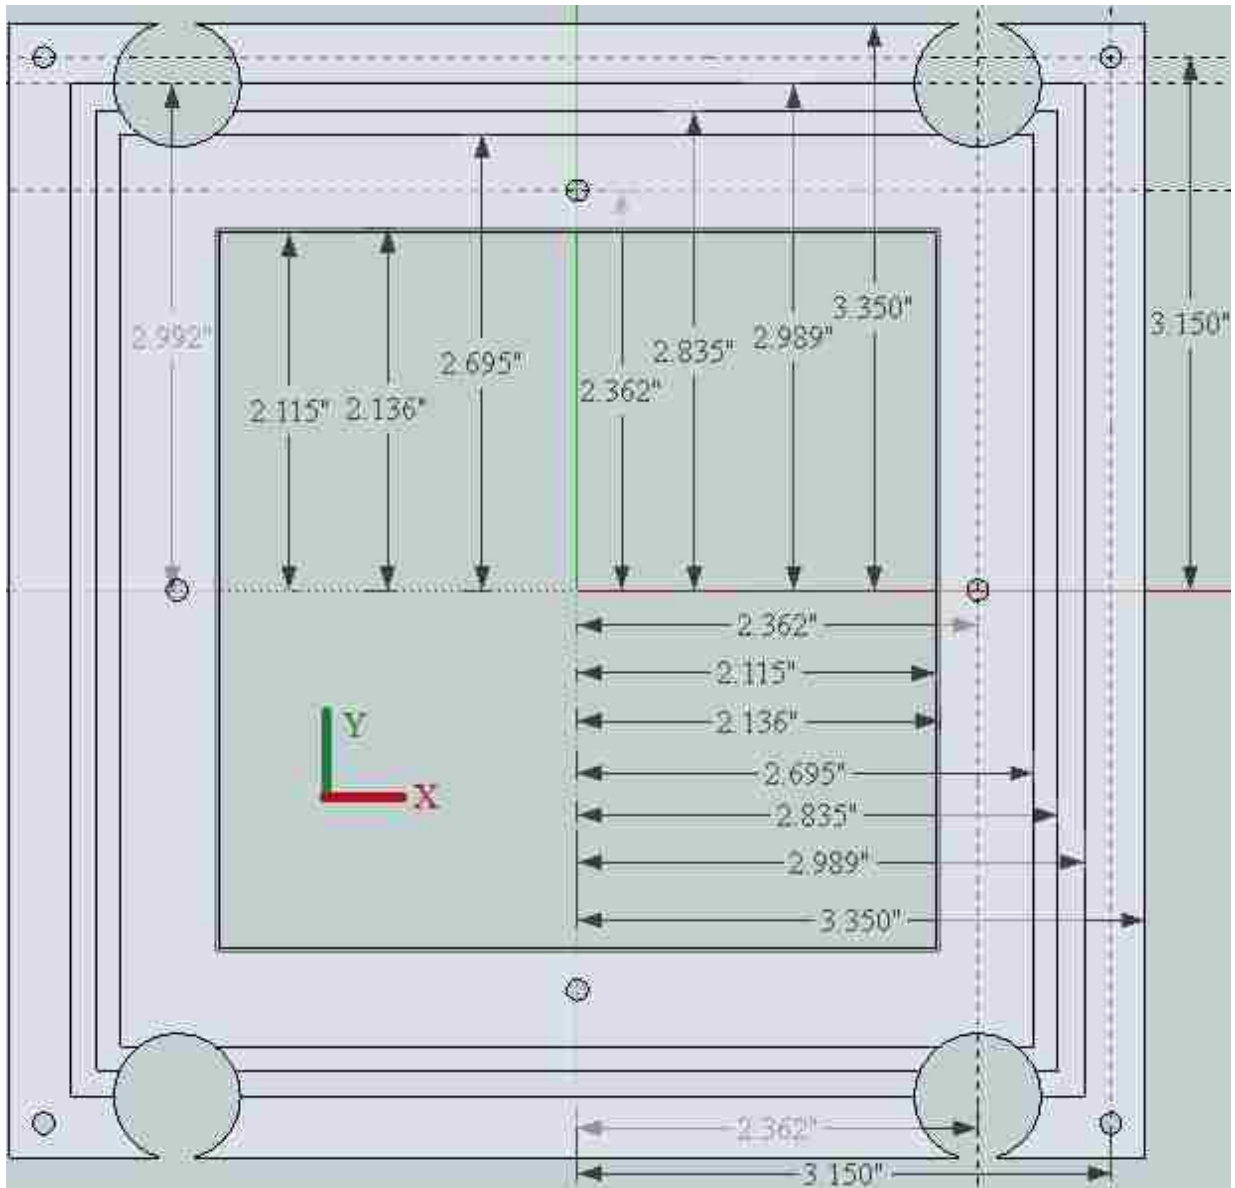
Top view of the 10x10 cm² middle trimmer lead plate illustrating the in-plane and cross-plane dimensions. The middle trimmer is square, such that all non-hole dimensions are equal in the in-plane and cross-plane dimensions.
